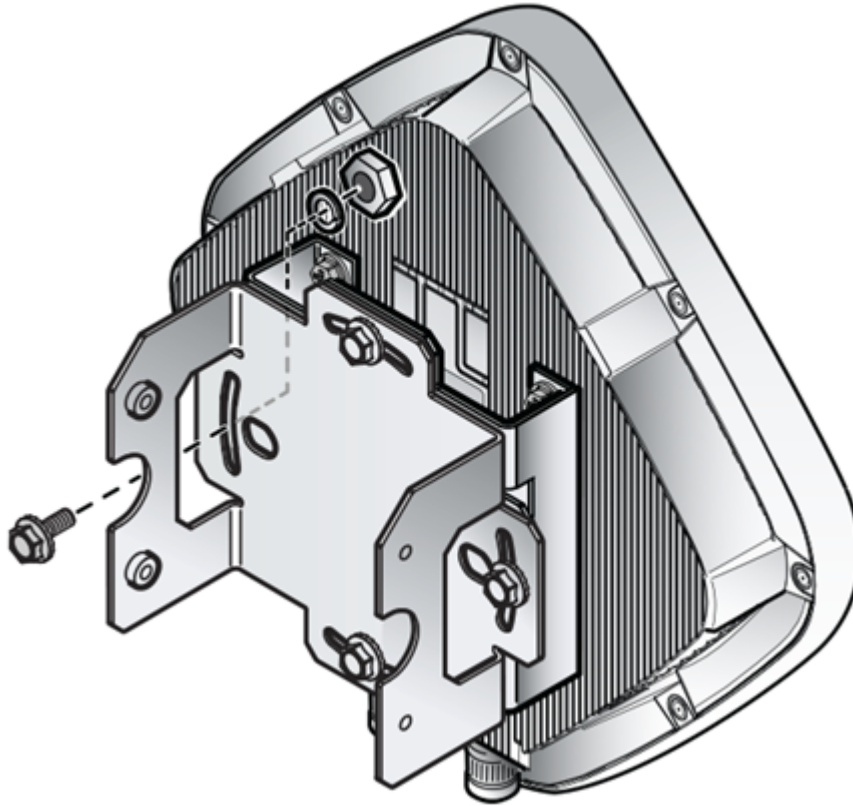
KT-147407-02 flat part attachment to -AX adapter bracket
